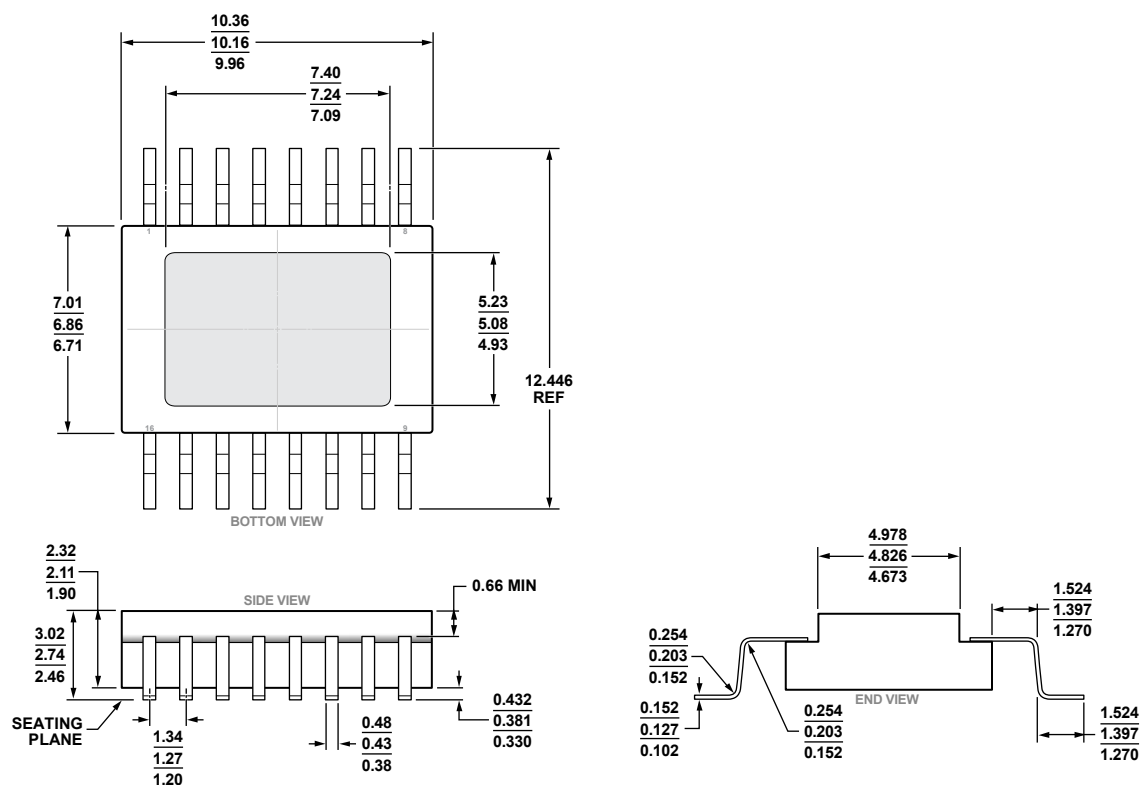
16-Lead Ceramic Flat Package with Reverse Formed Gullwing Leads [FLATPACK\_RF]
